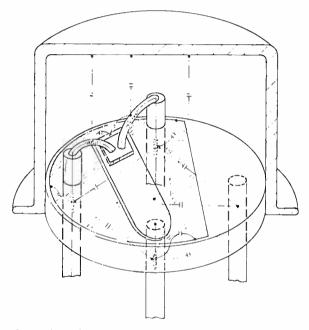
Configuration of the 2N2857 transistor in a TO-72 package showing parasitic components.
